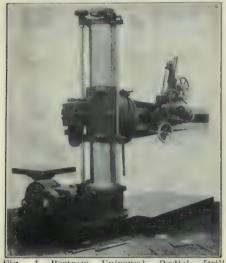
Bertram Universal Radial Drill driven by motor.
